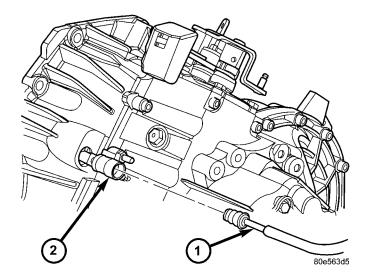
Clutch Slave Cylinder Hydraulic Connection
